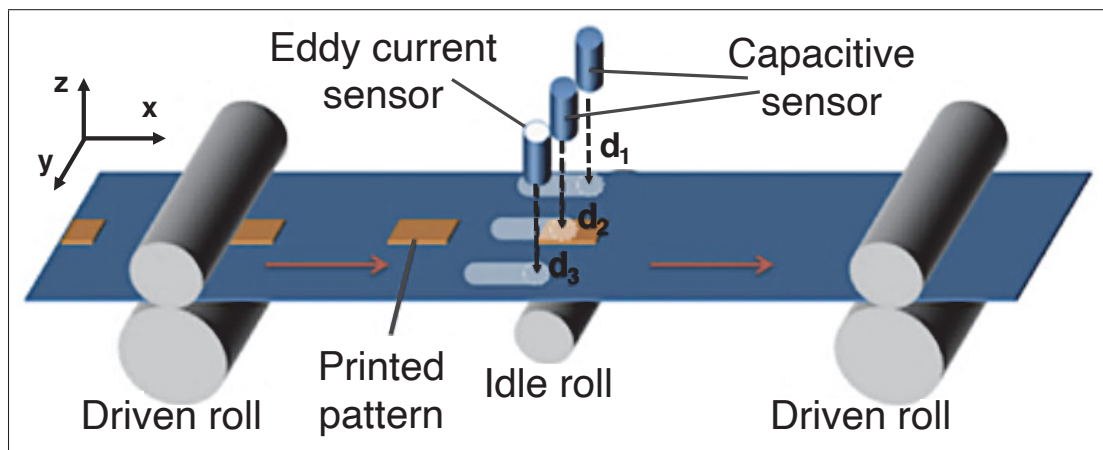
Online noncontact thickness measurement of printed conductive silver patterns in Roll-to-Roll gravure printing
